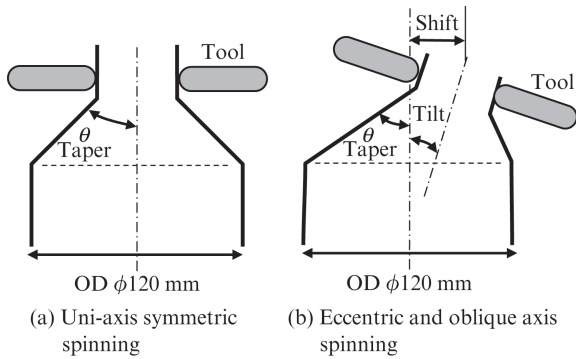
Schematic drawing of configuration of tool rotation type spinning
